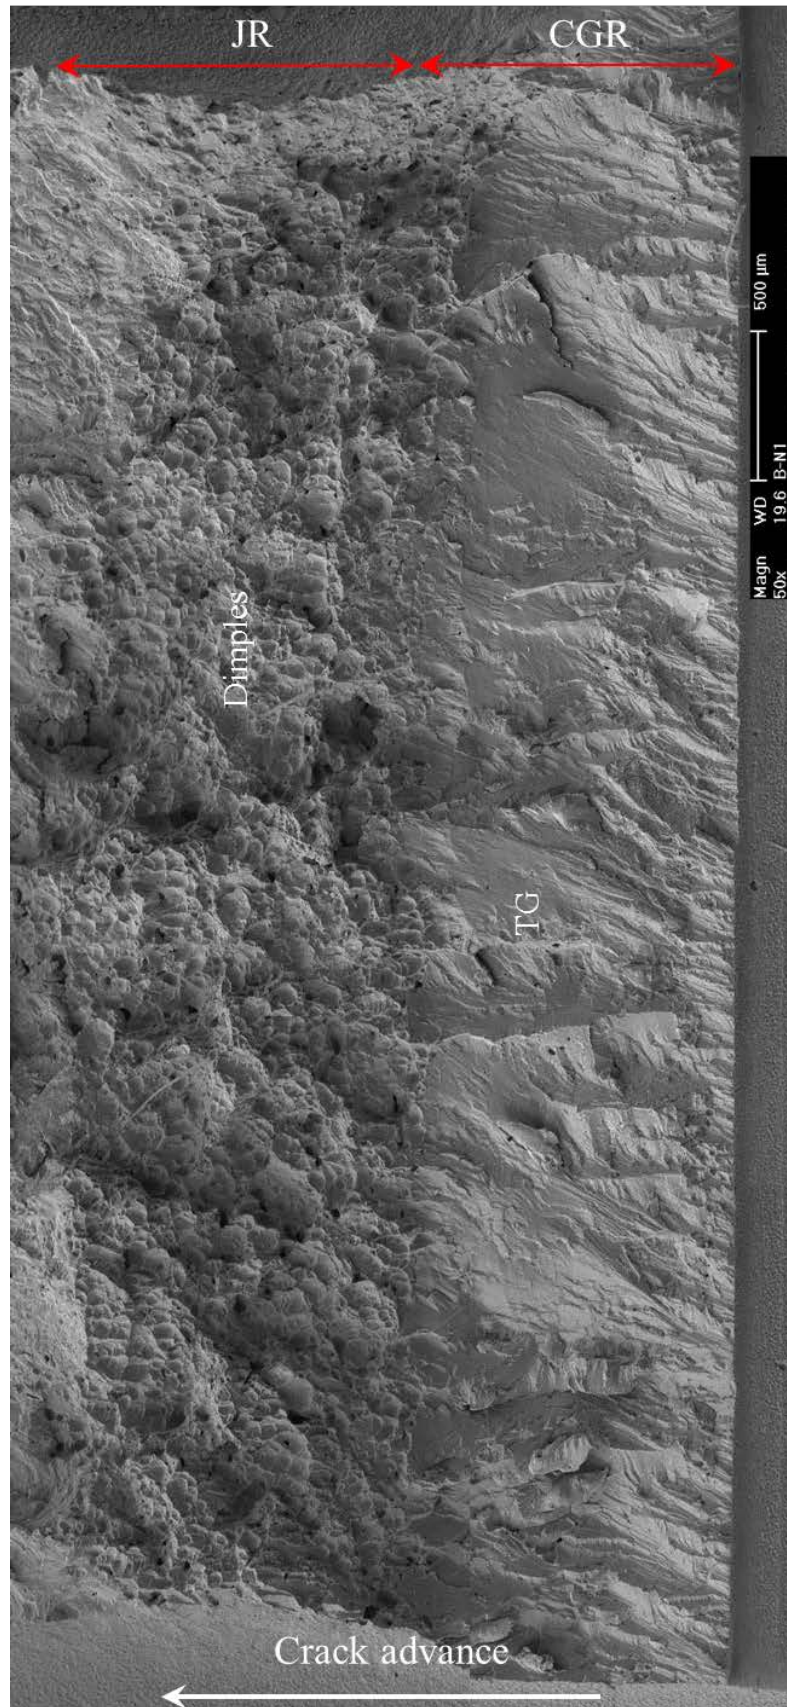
Fracture surface of specimen B-N1 tested in PWR water.
